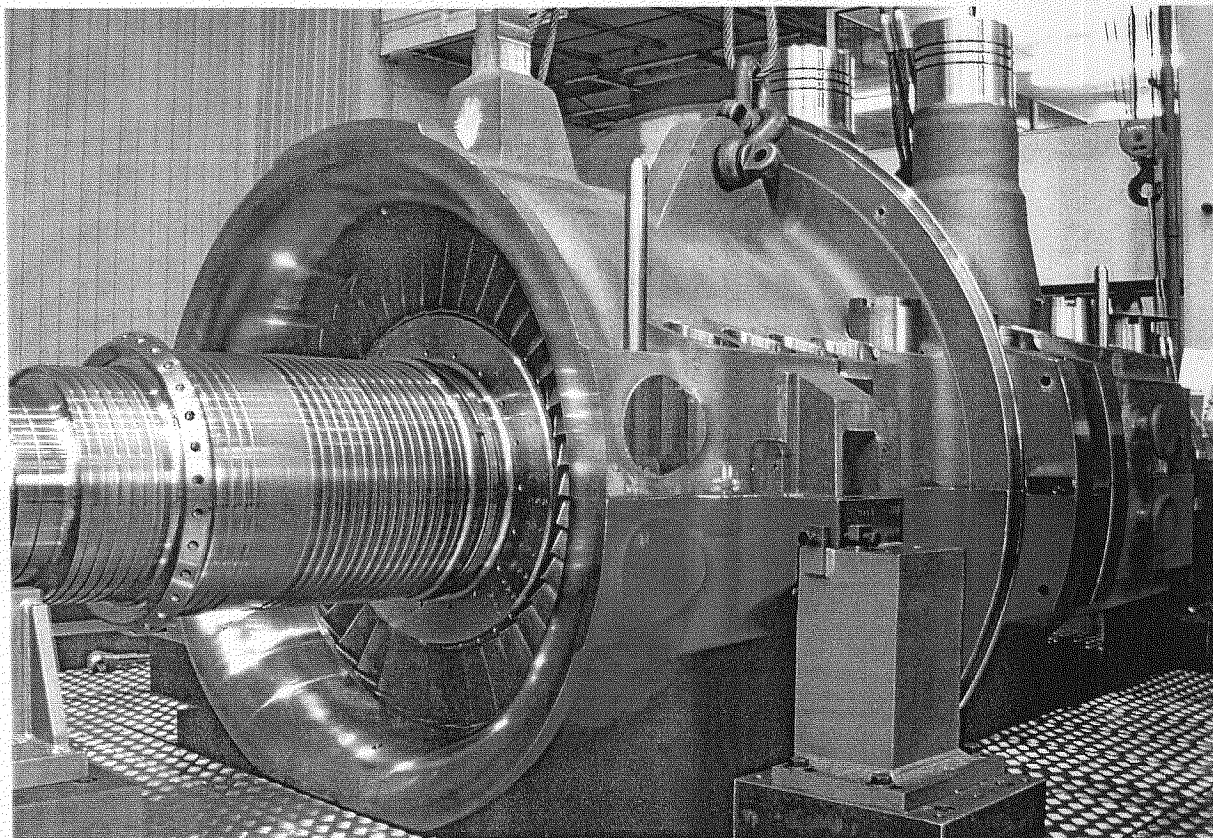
OLD INLET GLAND SHOWING HEAVY BOTTOM RUBS
